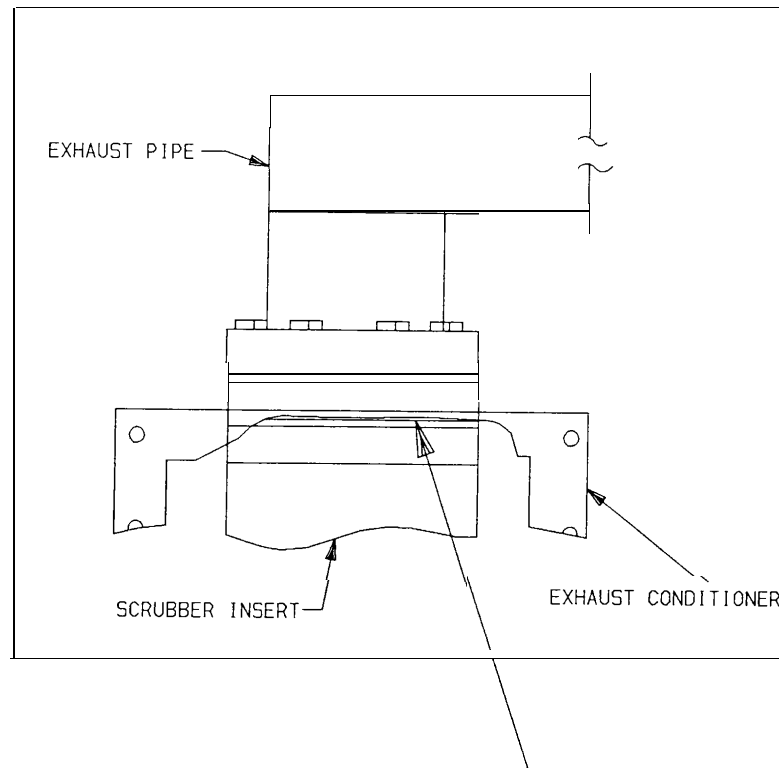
Gasket Between Exhaust Conditioner Flange and Scrubber Insert Flange.
